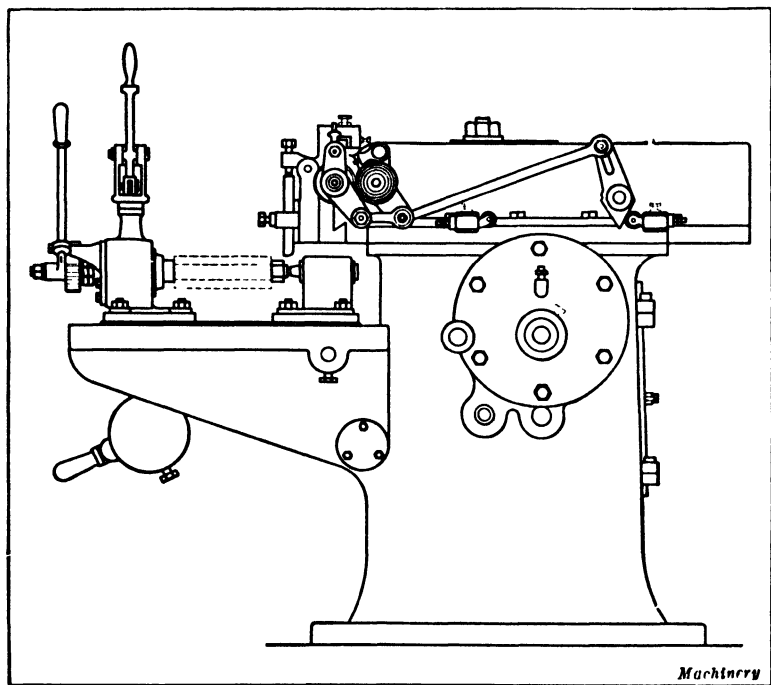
Side Elevation of a Nut-planing Machine — An Example of an Outline Drawing
